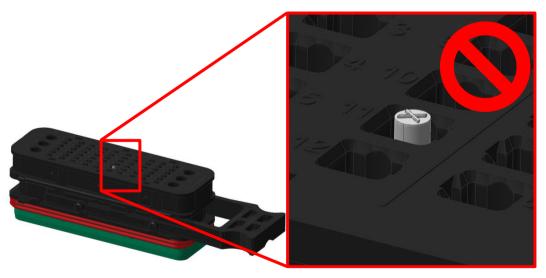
Shows the blind cavity plug over inserted into the female assembly
